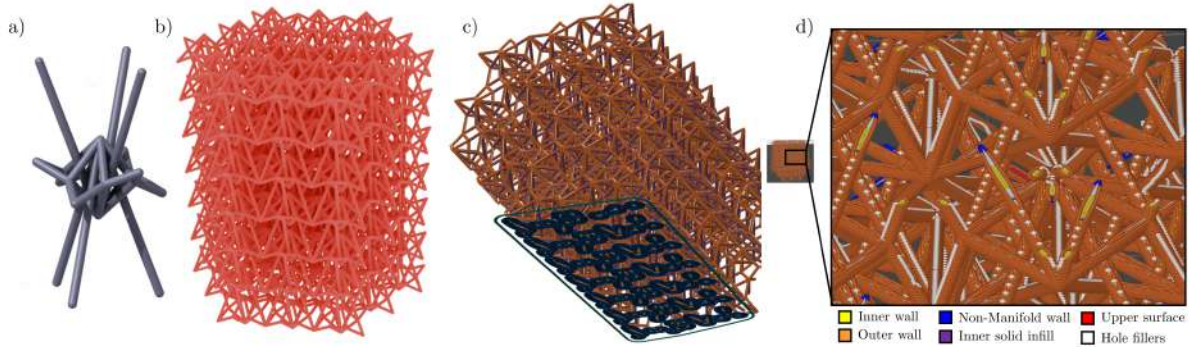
Metamaterial coupon. a) GAM cell geometry. b) Coupon geometry. c) Coupon manufacturing layout. d) Coupon geometry slicing strategy.
